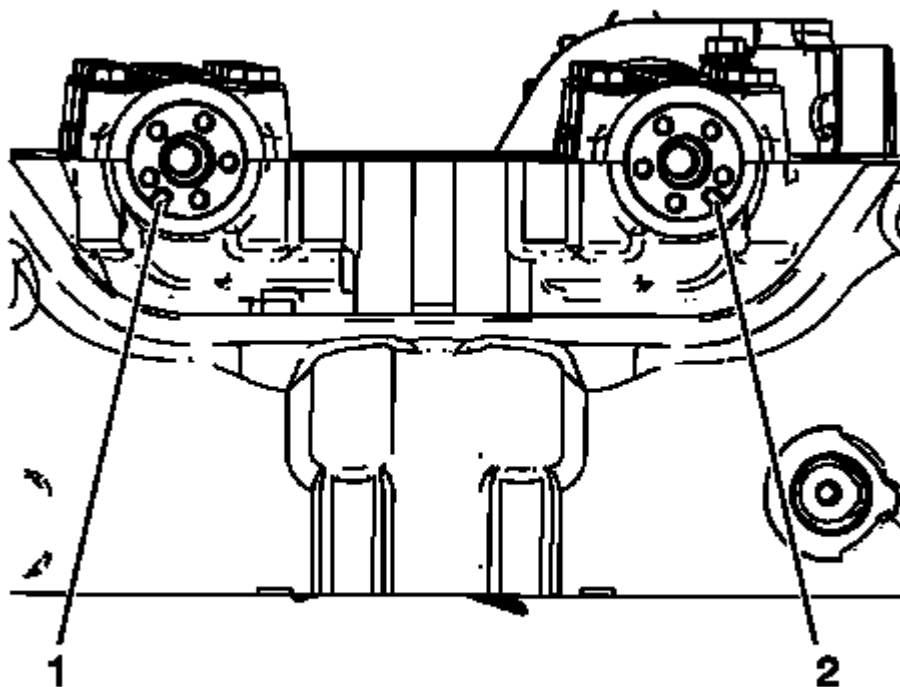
Identifying Proper Exhaust/Intake Camshaft Alignment positions
